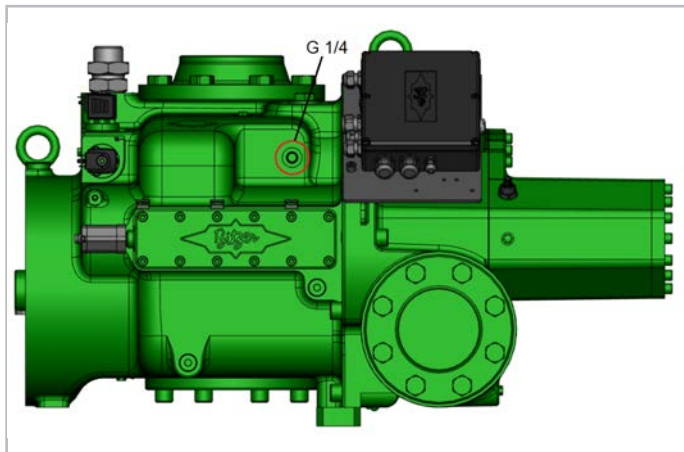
Side view OS.A9593 .. OS.A95103, the red outline indicates the additional bore with a set screw (corresponds to entry 24 in the dimensional drawing, see Operating instructions [SB-520](#) or BITZER SOFTWARE).
